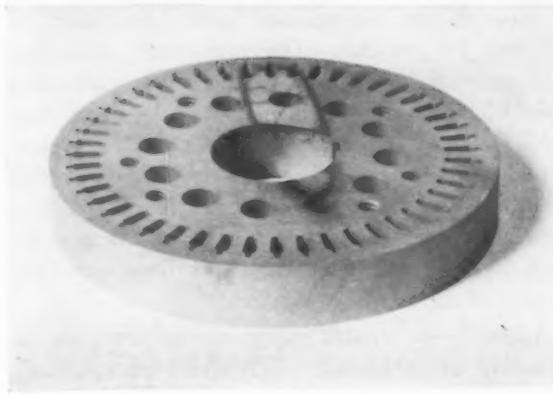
Etching this part brought out oval section shown, which indicated severe heat and burning during grinding.
